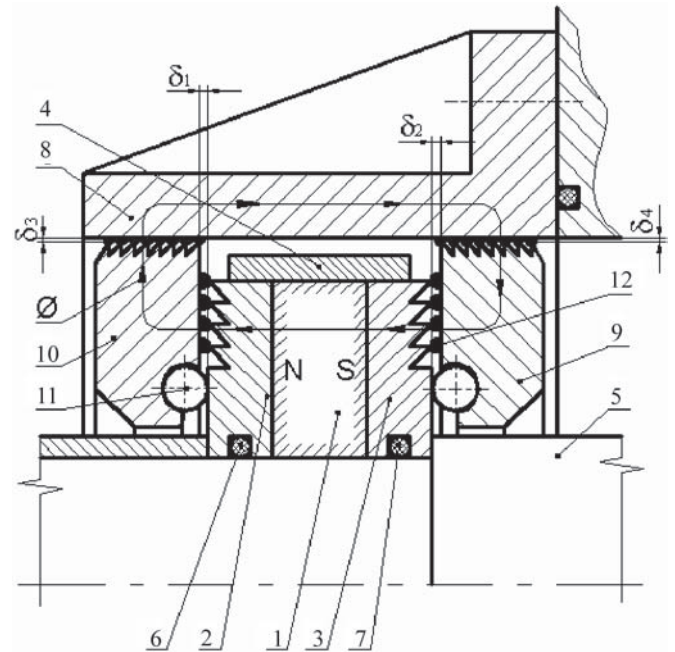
Magnetic fluid seal for a shaft with limited axial and radial runout: 1 – permanent magnet; 2, 3 – pole shoes; 4 – clamping ring; 5 – shaft; 6, 7 – sealing O-rings; 8 – casing; 9, 10 – self-adjusting rings; 11 – rolling element; 12 – magnetic fluid
